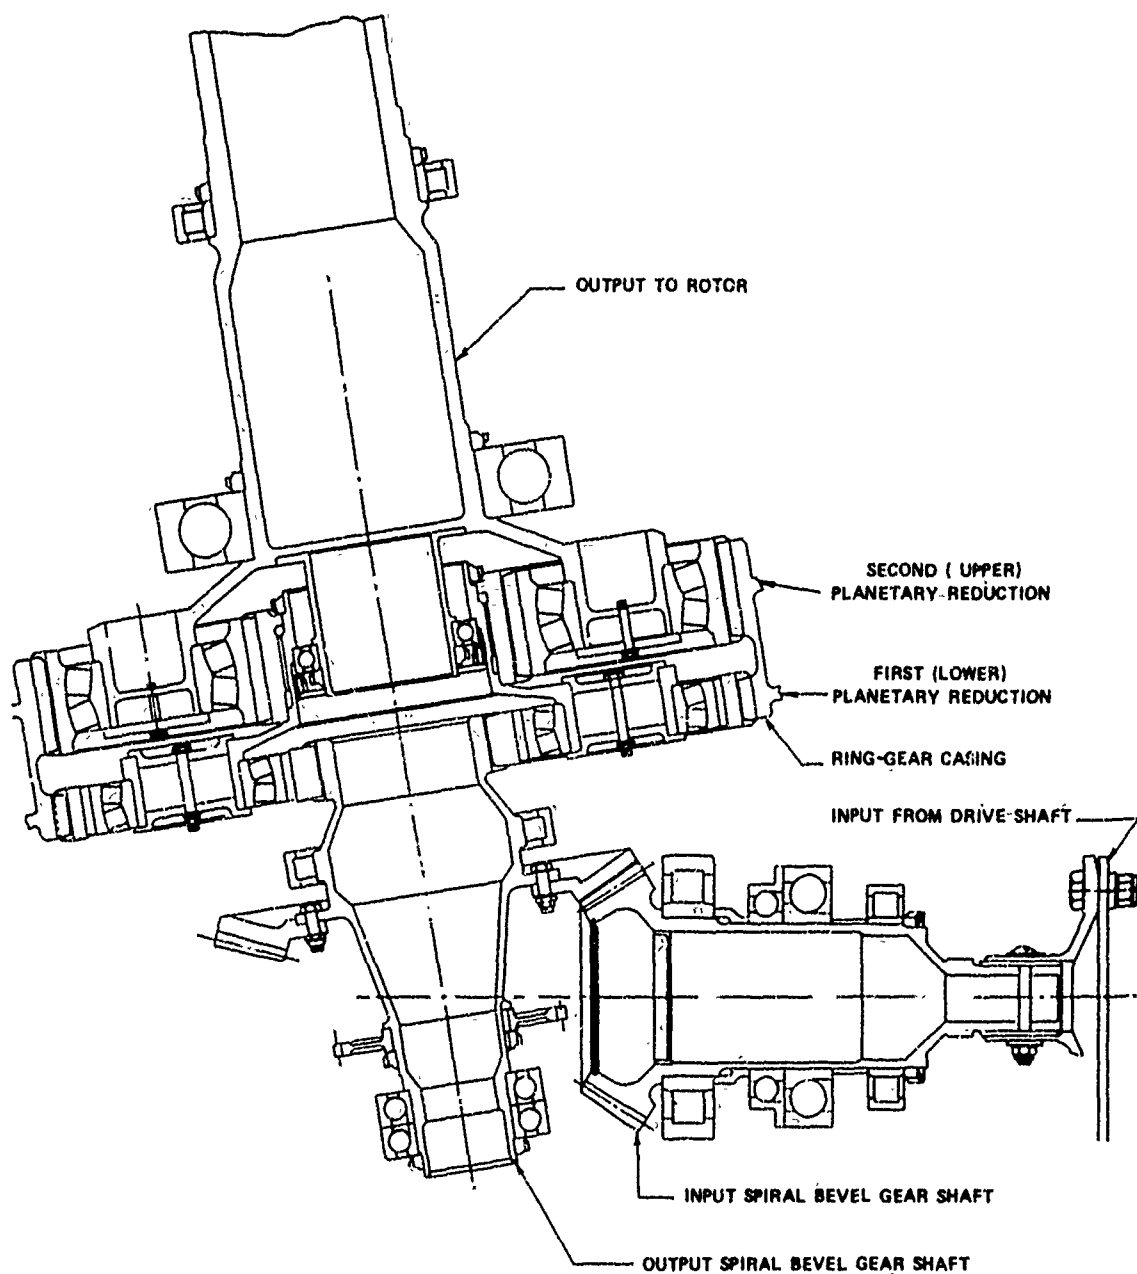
CH-47 Forward Rotor-Drive Gearbox Bevel Gear Shaft-Bearing System.
